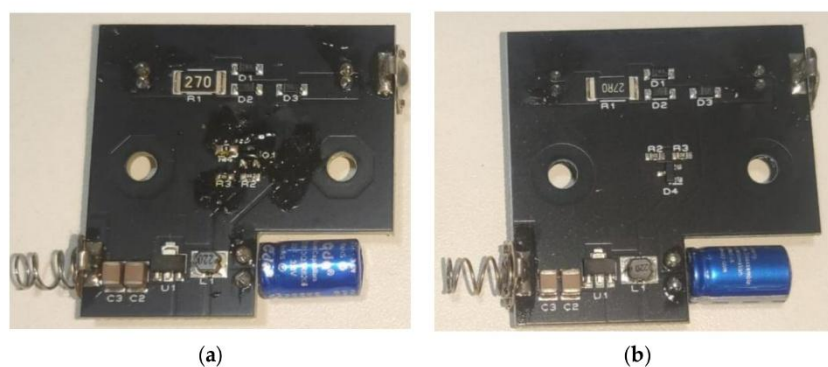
Demonstrated (a) PCB circuit with electronic load and (b) PCB shunt regulator circuit.
